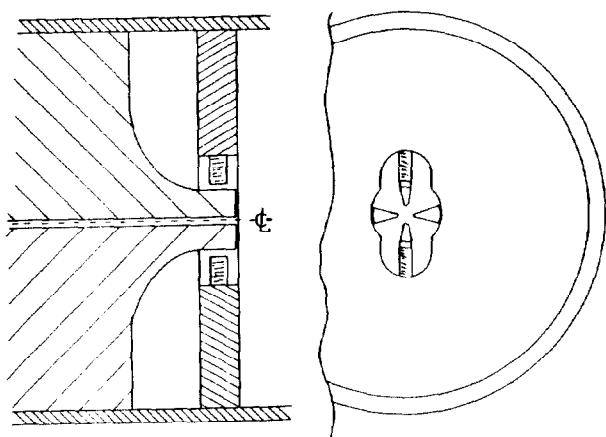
Side view section and end view of the radial end tuner configuration used to test the new terminating methods.
